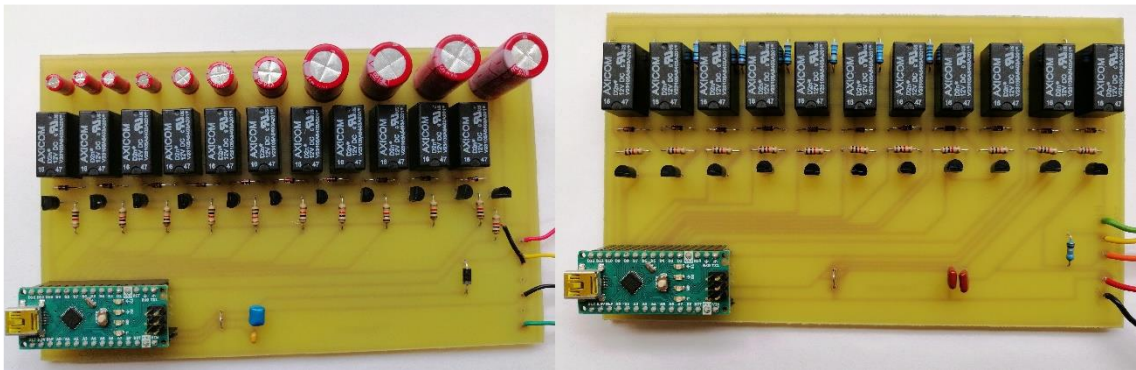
PCB with welded components. at left the capacitors, at right the resistance
